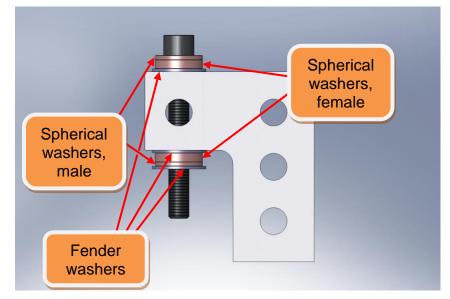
Actuator L-Bracket, with screw and washers. Two of these mount to Coil Support on Horizontal Actuator. Spherical washers and loose thru holes compensate for machining and assembly tolerances, when Actuators are installed in HAM ISI.
